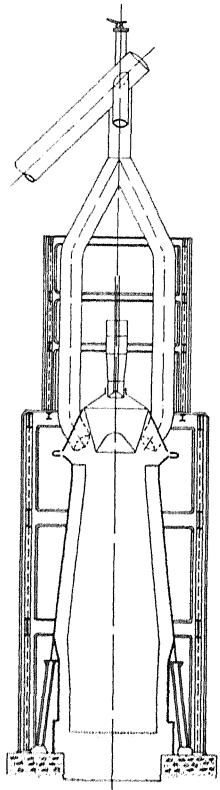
BLAST FURNACE - JAPANESE TYPE
